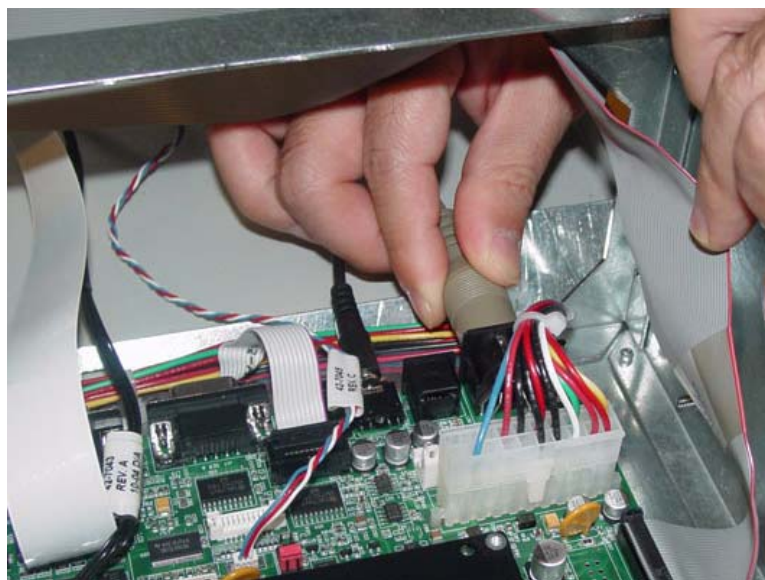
Connect the Keyboard Cable to J42 of the Motherboard
